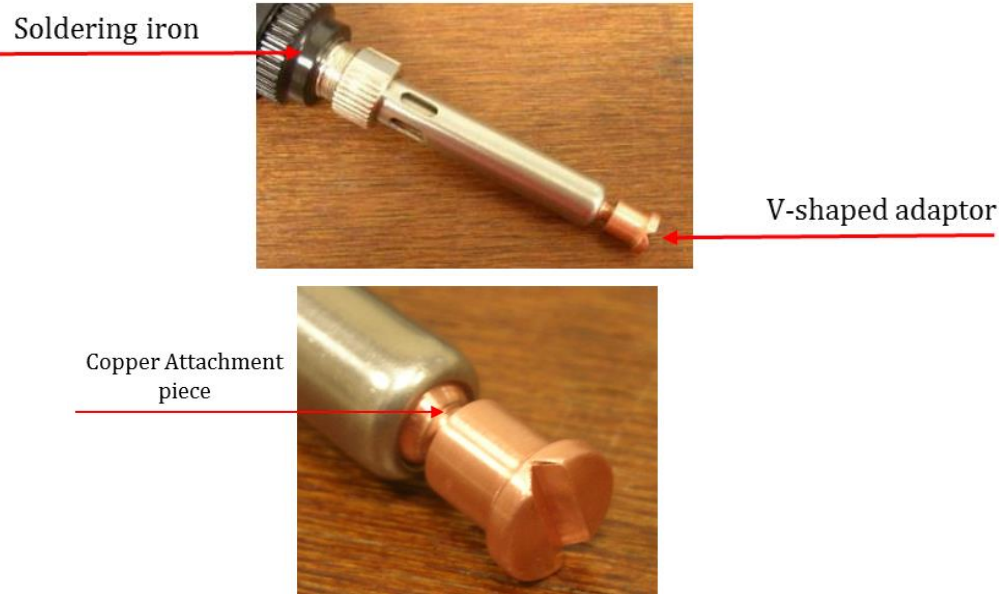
Reforming equipment – Soldering iron with specifically design connector and v-shaped adaptor (bottom).
